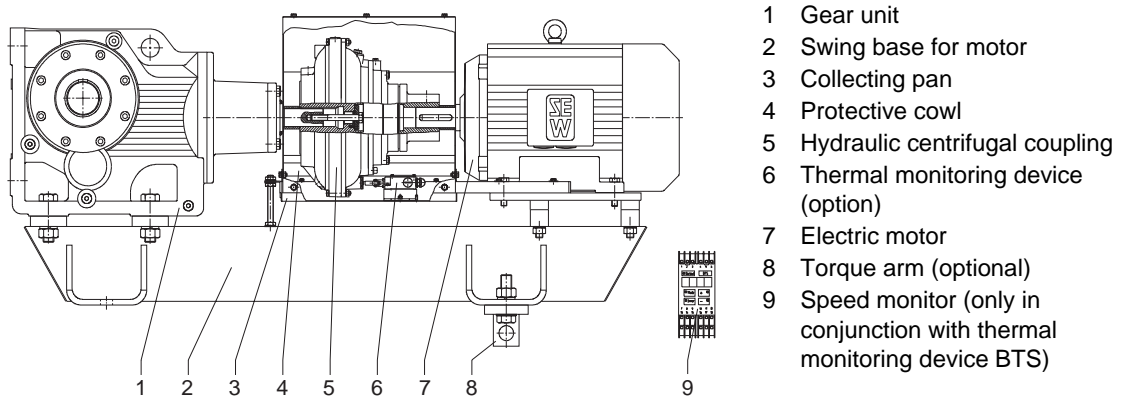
Drive with hydraulic centrifugal coupling on swing base for motor
